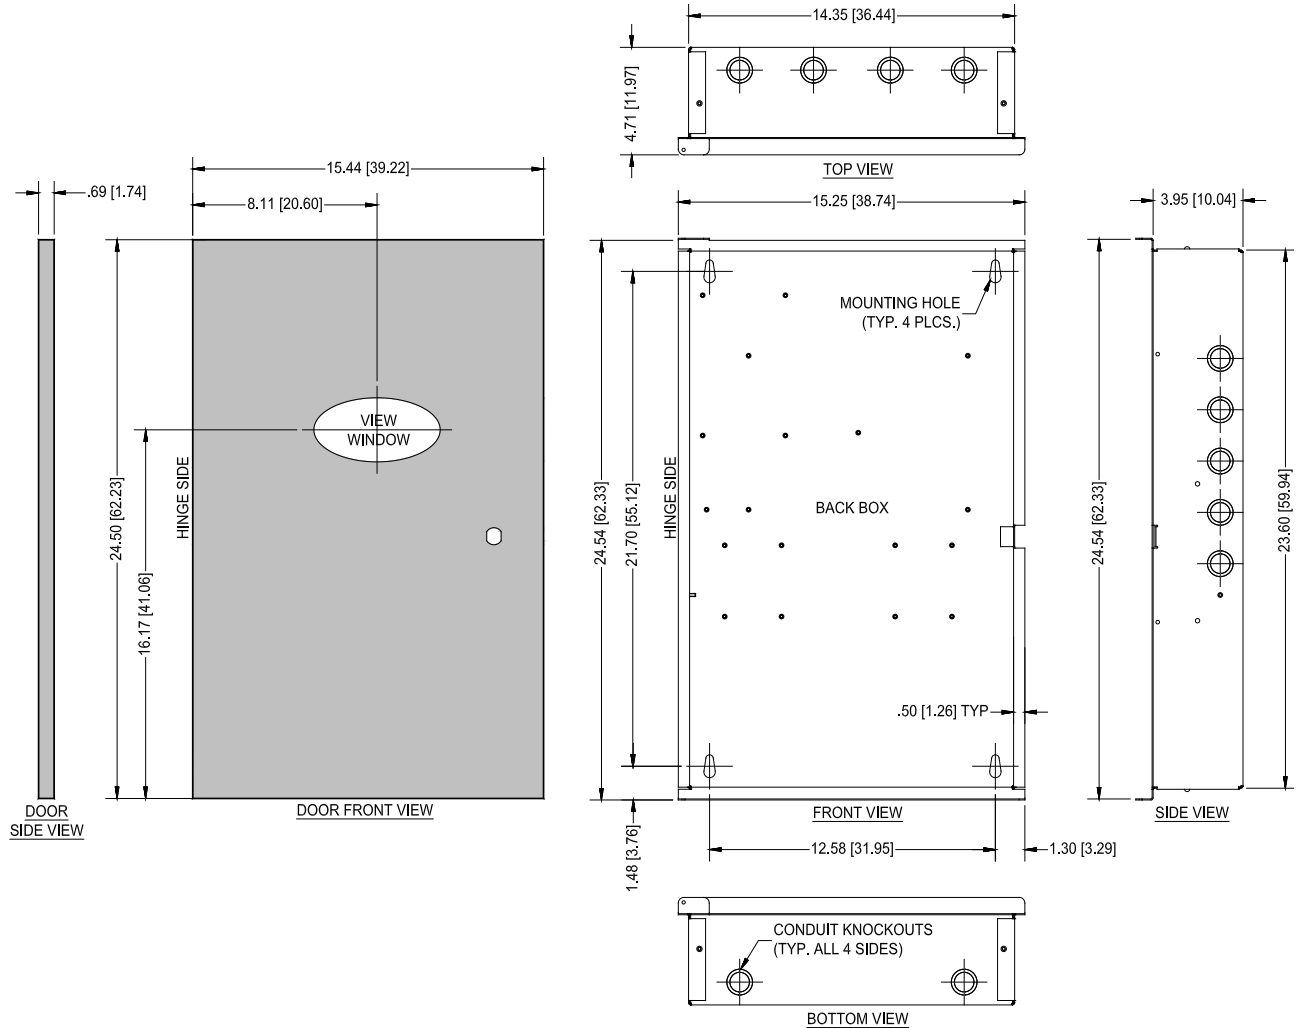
Cheetah Xi Enclosure Dimensions (inches/cm)
